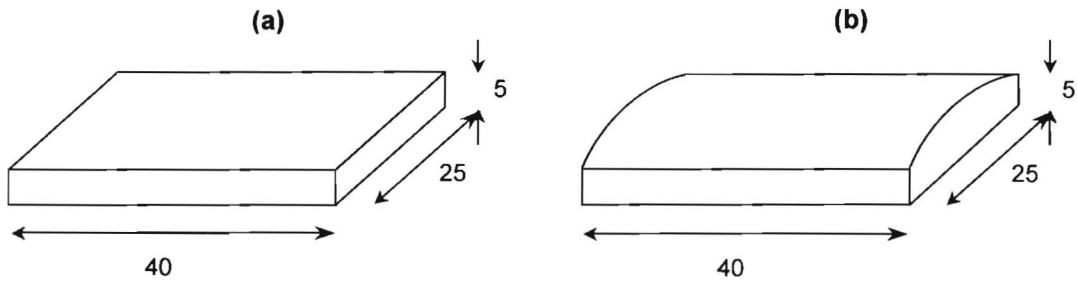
Dimensions of steel specimens used in erosion testing (a) Dimensions of general test specimens (b) Specimen used to test original surface of steam coil tube, displaying slight curvature of the test surface. Dimensions in millimetres.
